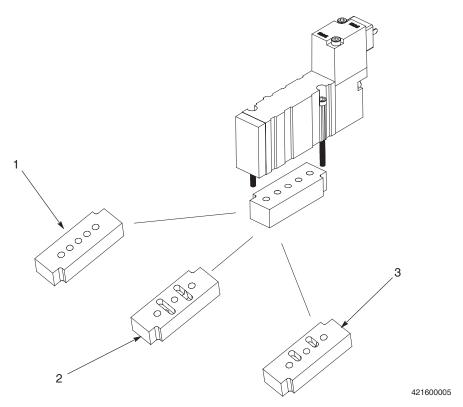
Example of flange-mounted solenoid valves, solenoid valve diverter plates, and block-off plates
